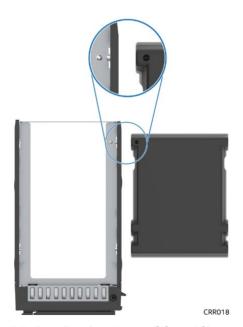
2.5" Drive Carrier Assembly – Alignment Features
